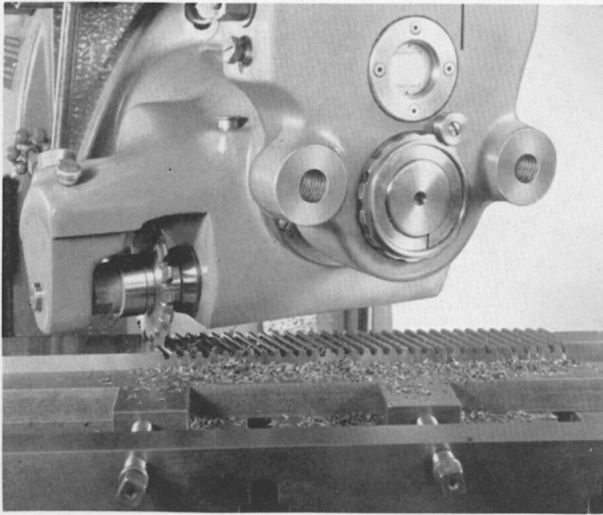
Close-up view of the set-up used in milling the teeth of a spiral rack.
